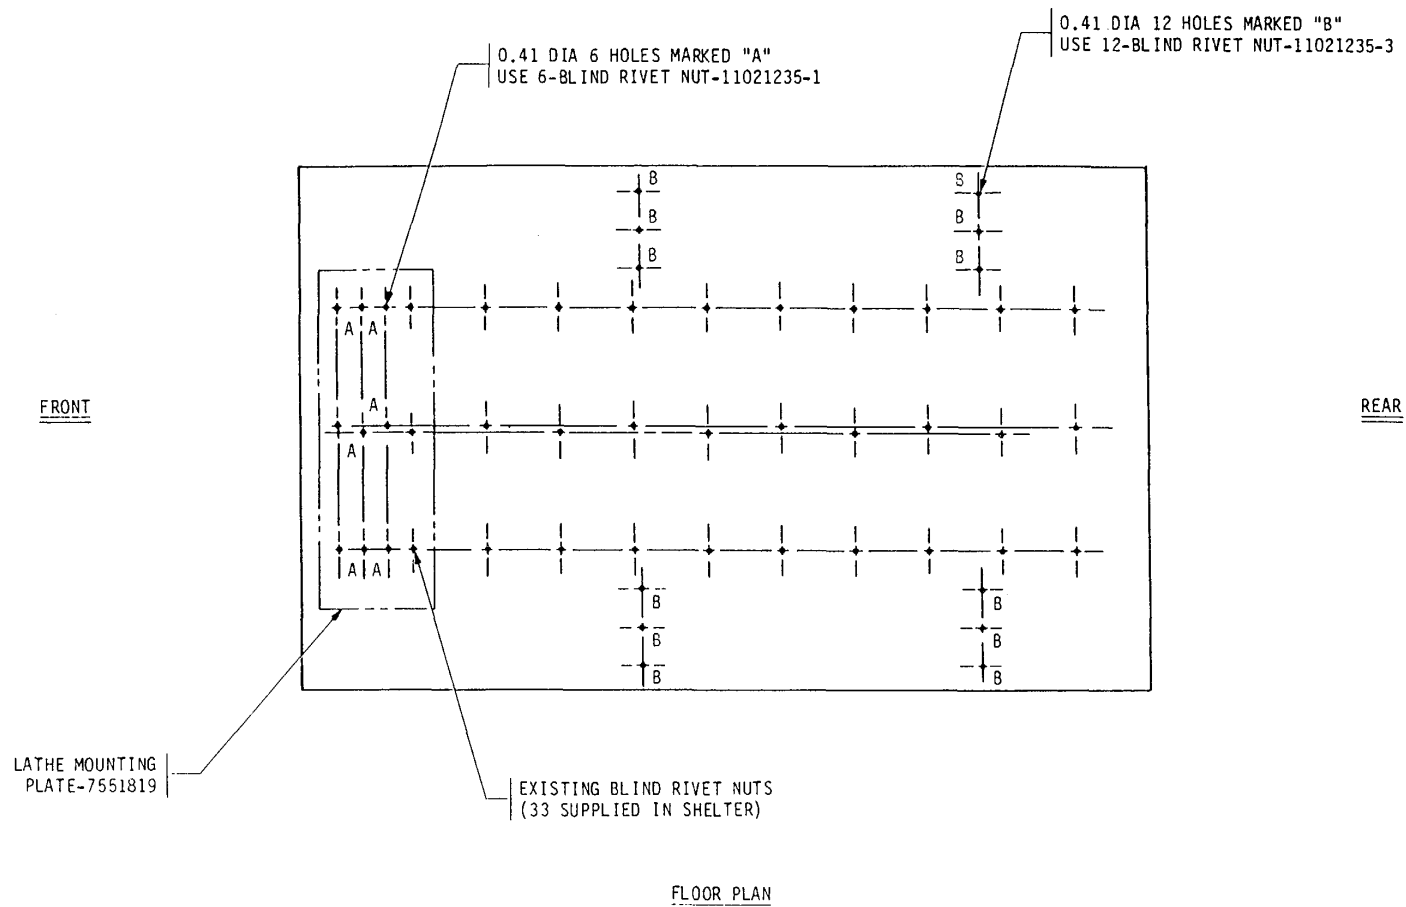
Dimensions for blind rivet nut installation in floor, unit 1, 280.
